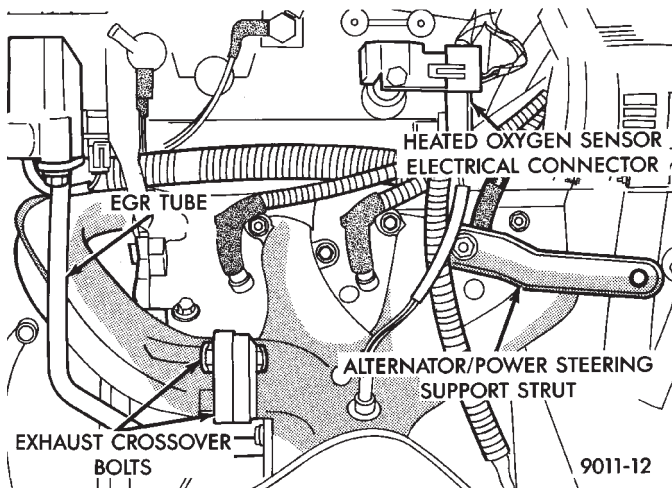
EGR Tube, Heated Oxygen Sensor and Alternator/Power Steering Strut
